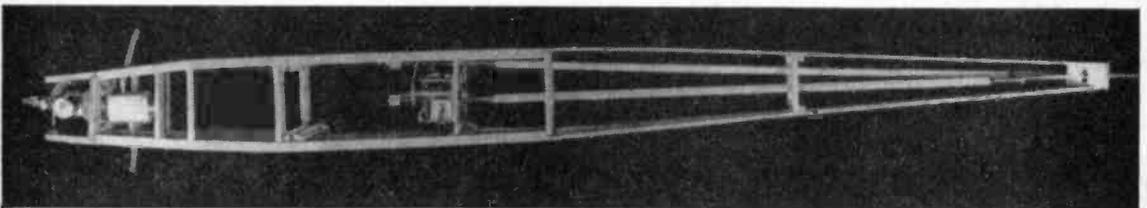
The assembled fuselage with all formers, bulkheads, engine, tank, escapement and torque rods installed. Top and bottom removed for photo.
